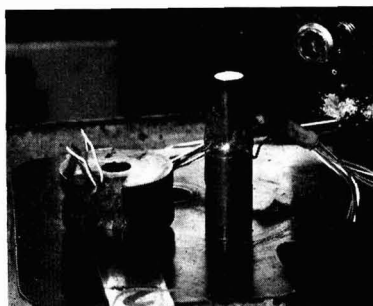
The top punch and cut away die assembly, showing strain gauges
